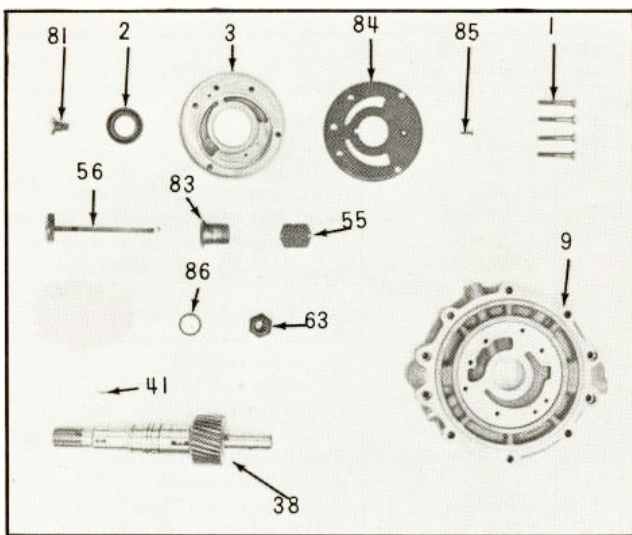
Parts Display for Forward & Reverse AS11-72 Transmission. Only Those Parts Different from the AS11-72C Assembly are Illustrated.
